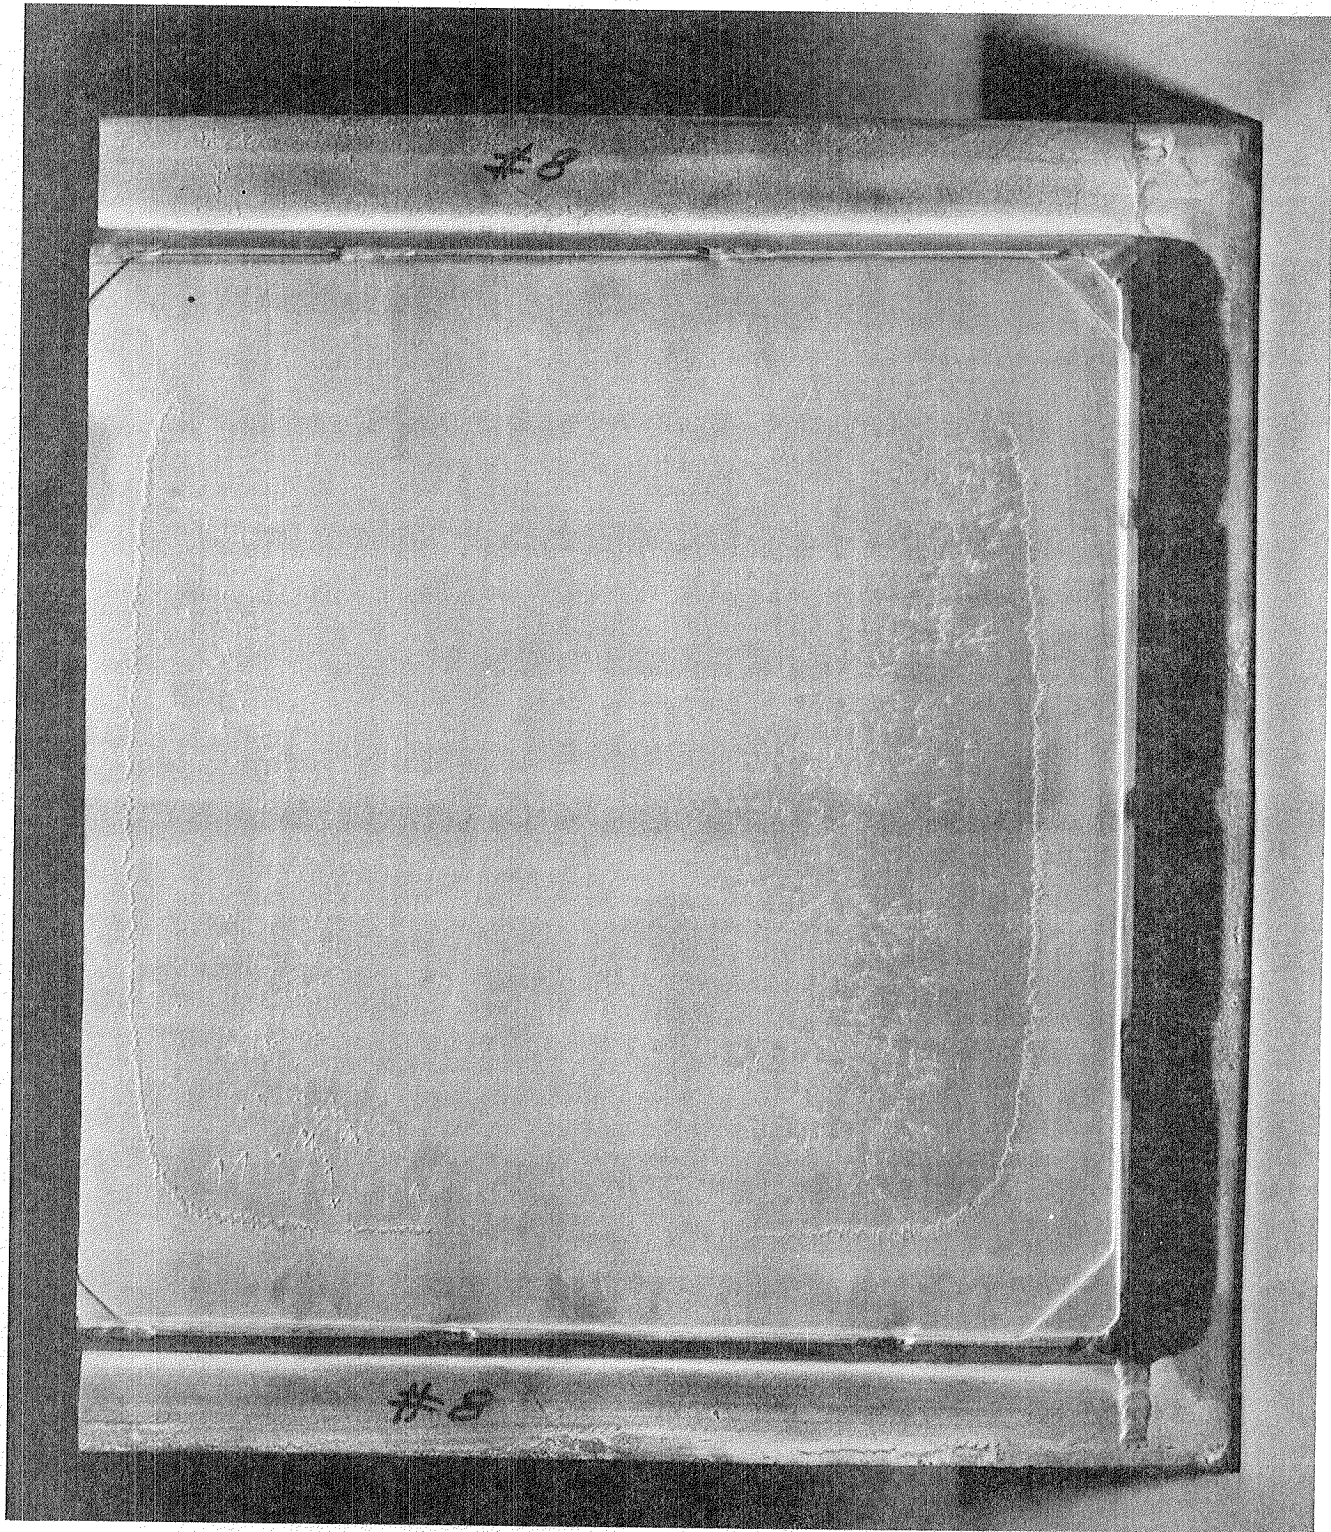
PANEL NO. 8 BOTTOM FACE SHEET
